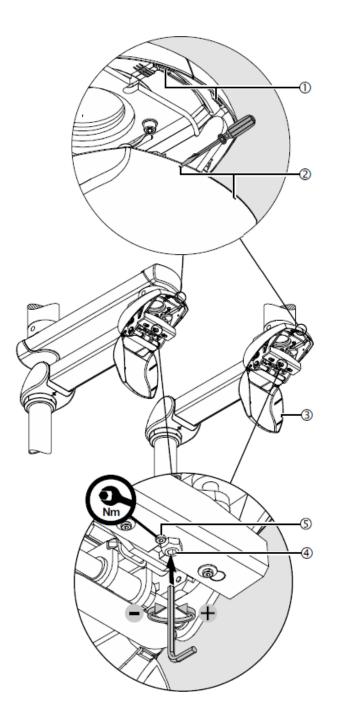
Adjusting the load capacity of the spring arm and the rear bottom cover lock
